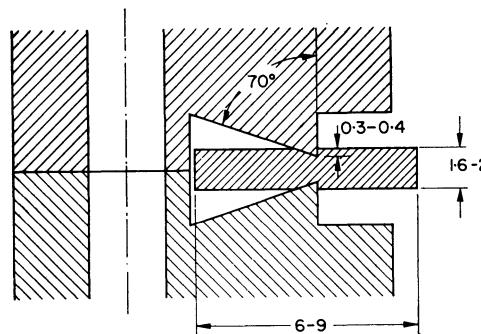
Dimensions (mm) of a Conflat seal. After Wheeler¹³⁰⁴ (*Courtesy of Pergamon Press*)
